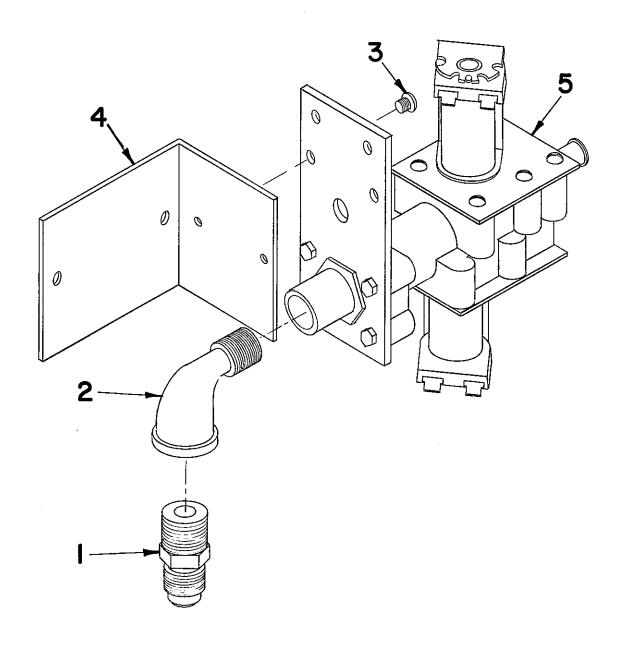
INLET VALVE AND MOUNTING BRACKET ASSEMBLY
